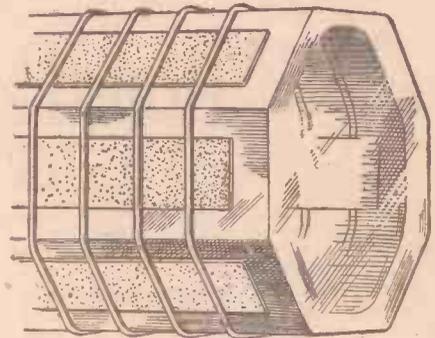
Here a solid former is used for the preliminary coil winding. It is afterwards removed.
